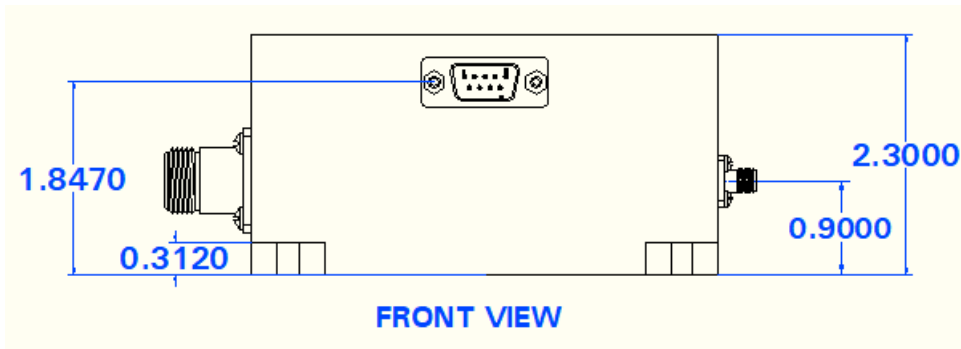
20-100 MHz 1000W CW PIN T/R Switch Mechanical Dimension, front view.
